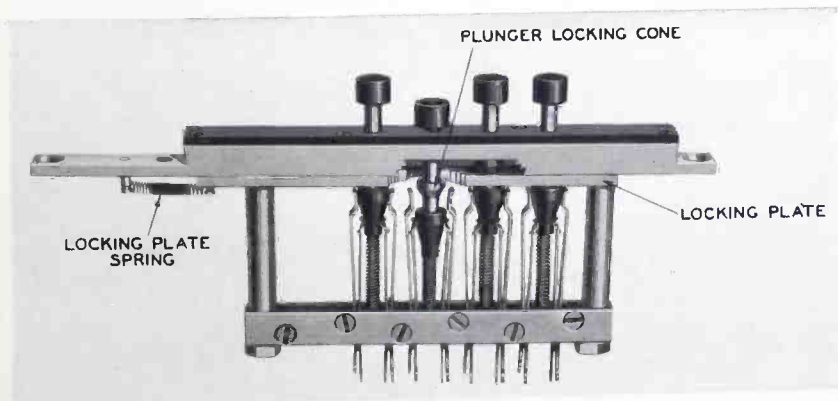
In mechanically locking keys the action of an electromagnet is replaced by that of a sliding latch plate. The side of the key and the locking plate have been cut out to show the locking mechanism
